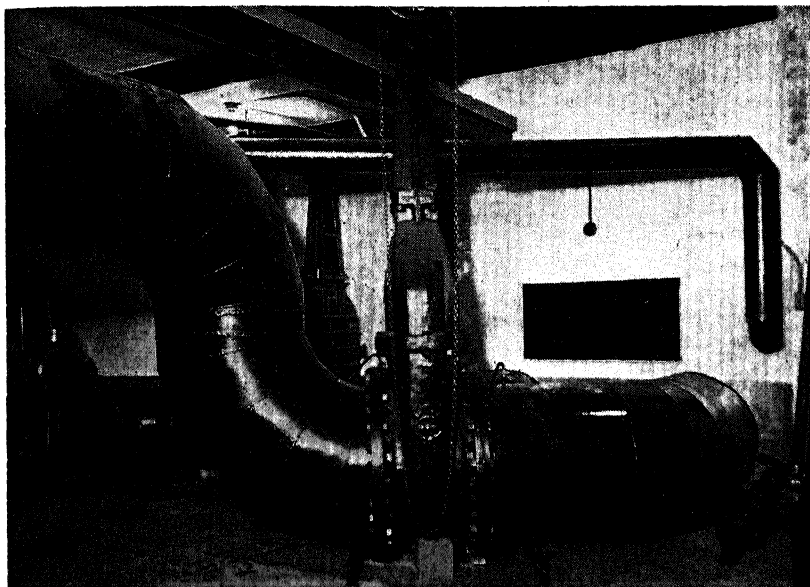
All arc welded 36-in cooling water line in a steam power plant.
